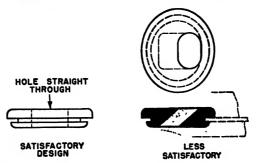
Although rubber grommets are made in both the shapes shown, the one with the angular hole (*right*) is difficult to mold and remove from the cavity without splitting. Also, its mold is more costly to make and to maintain.
